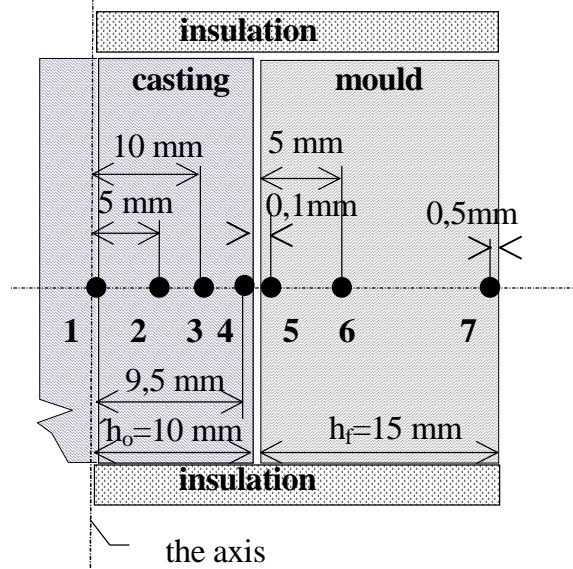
A schematic view on the casting and the mould and the thermocouples positions.
